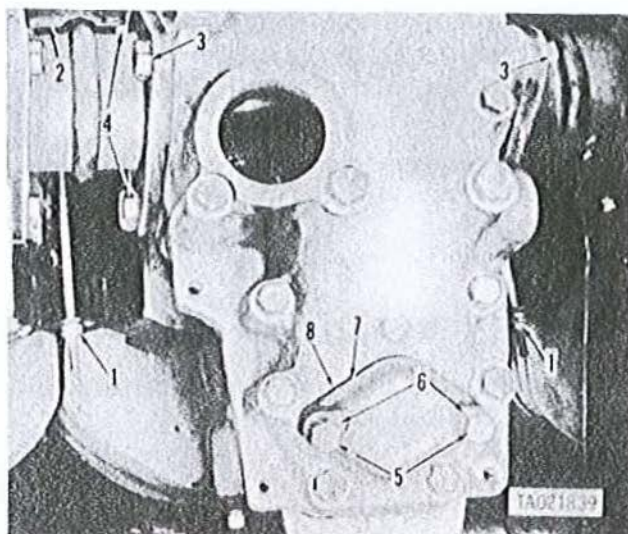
Removing or installing fuel injector nozzle and holder assembly.
